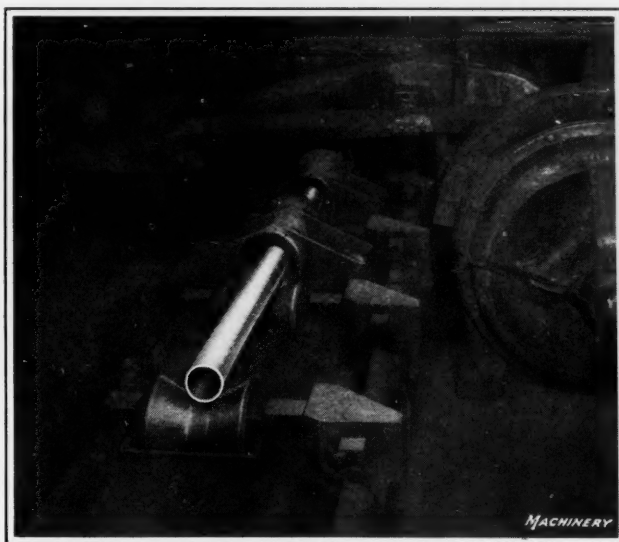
Rolled Tube entering Reeling Machine equipped with Rolls for removing Mill Scale and partially correcting Outside Diameter
